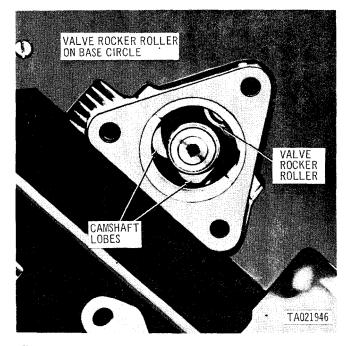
Correct position of camshaft lobes on 1R cylinder for injection pump timing.
